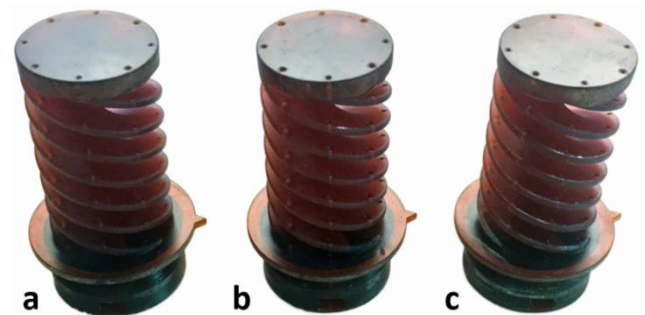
Test segments a, b and c fabricated with different dimensions. Dimensions vary in diameter of the central rod, steering cable opening, guiding cable opening and with and depth of the gap for the rotation stop knob. This image shows the test segment and indicates the minuscule variance in dimensions of the test segments.
